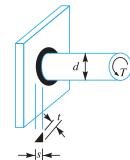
Circular fillet weld subjected to torsion.
